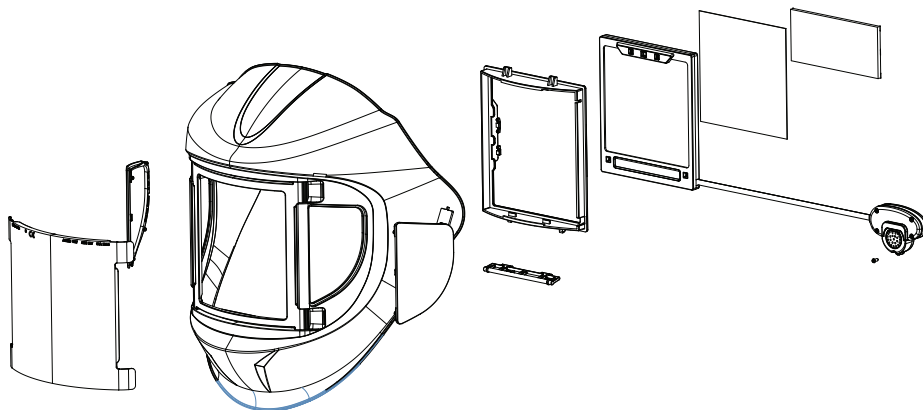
Exploded Line Drawing of Arcmaster Front & Rear Lens Positioning
